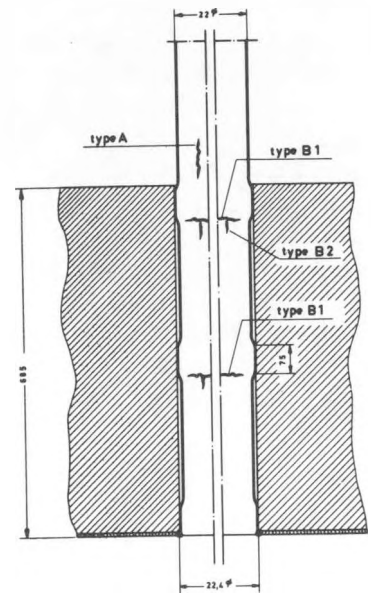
A: SCHEMATIC OF TUBE-TUBE SHEET AT OBRIGHEIM, SHOWING LOCATION OF PRIMARY SIDE SCC (TYPE B) AND SECONDARY SIDE CAUSTIC SCC (TYPE A)
